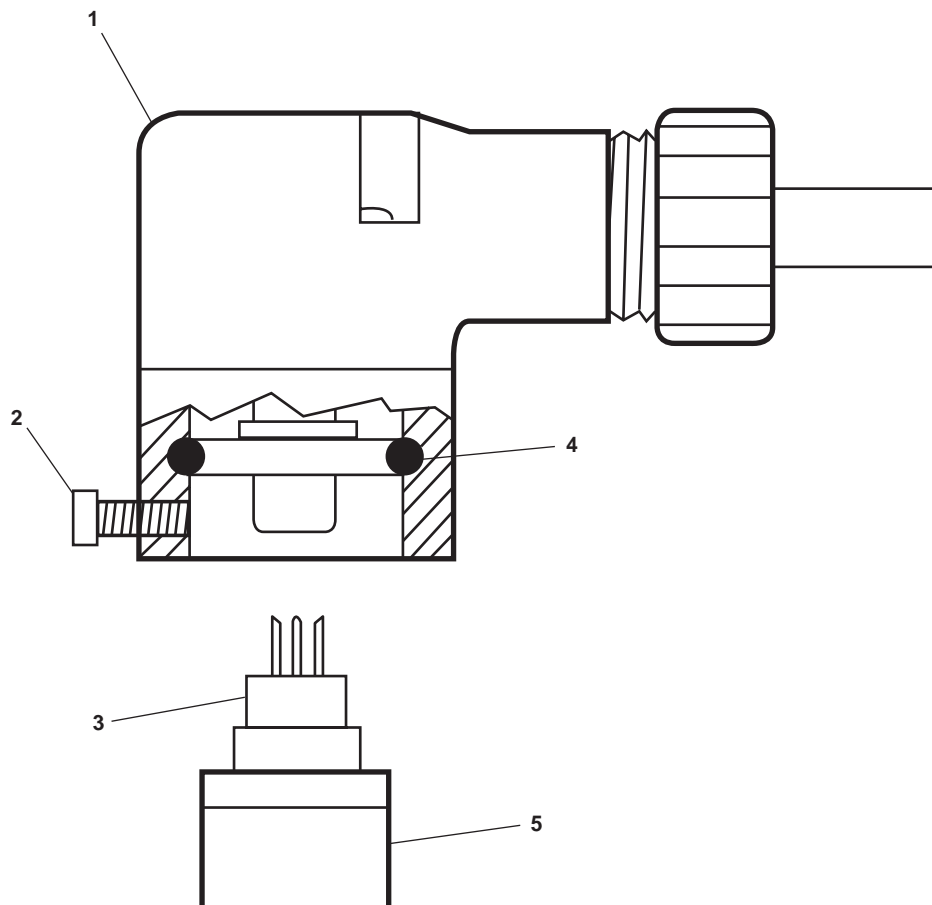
Cable Assembly Adapter and TLI Transmitter Connector (Typical)
